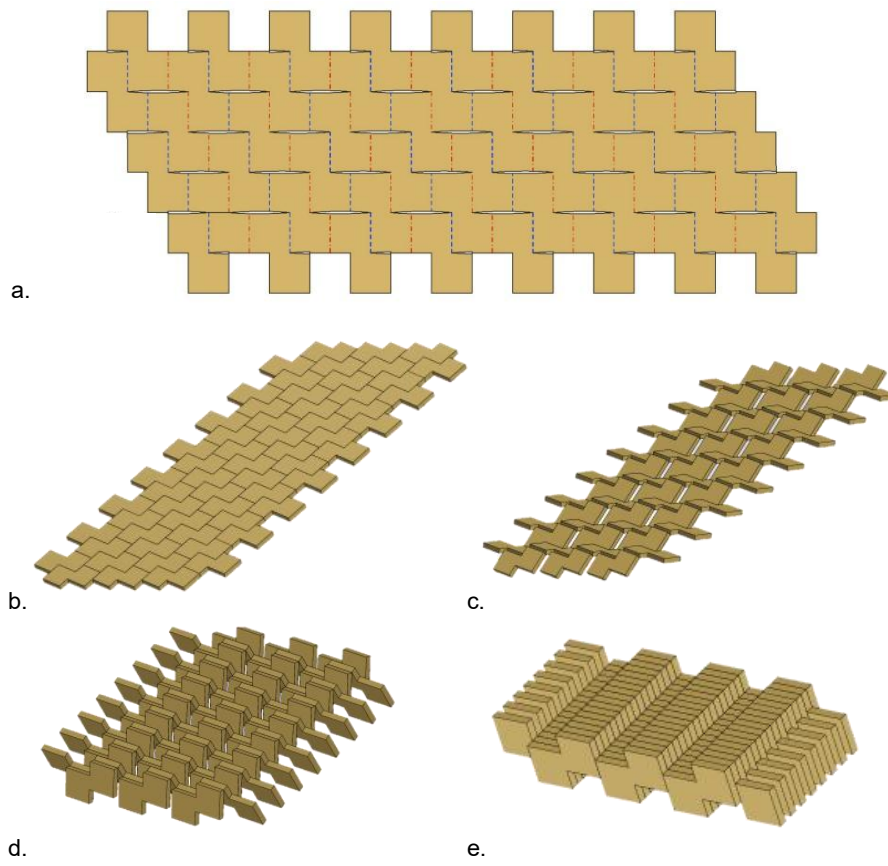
Layout of a large 4R linkage assembly. b-e. The assembly folding up to its compact state.
